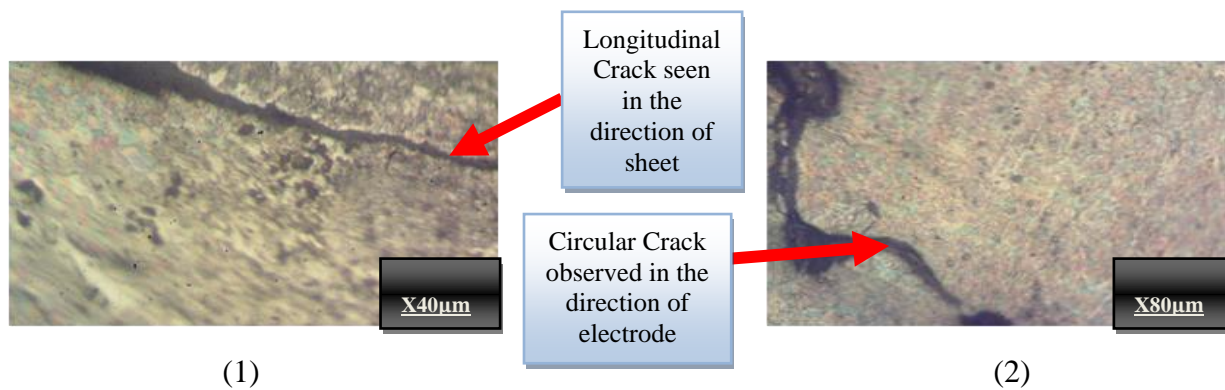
(1) Longitudinal joint cracks - under conventional electrodes, and (2) Circular joint cracks at the base of weld bead – under annular recess electrodes
